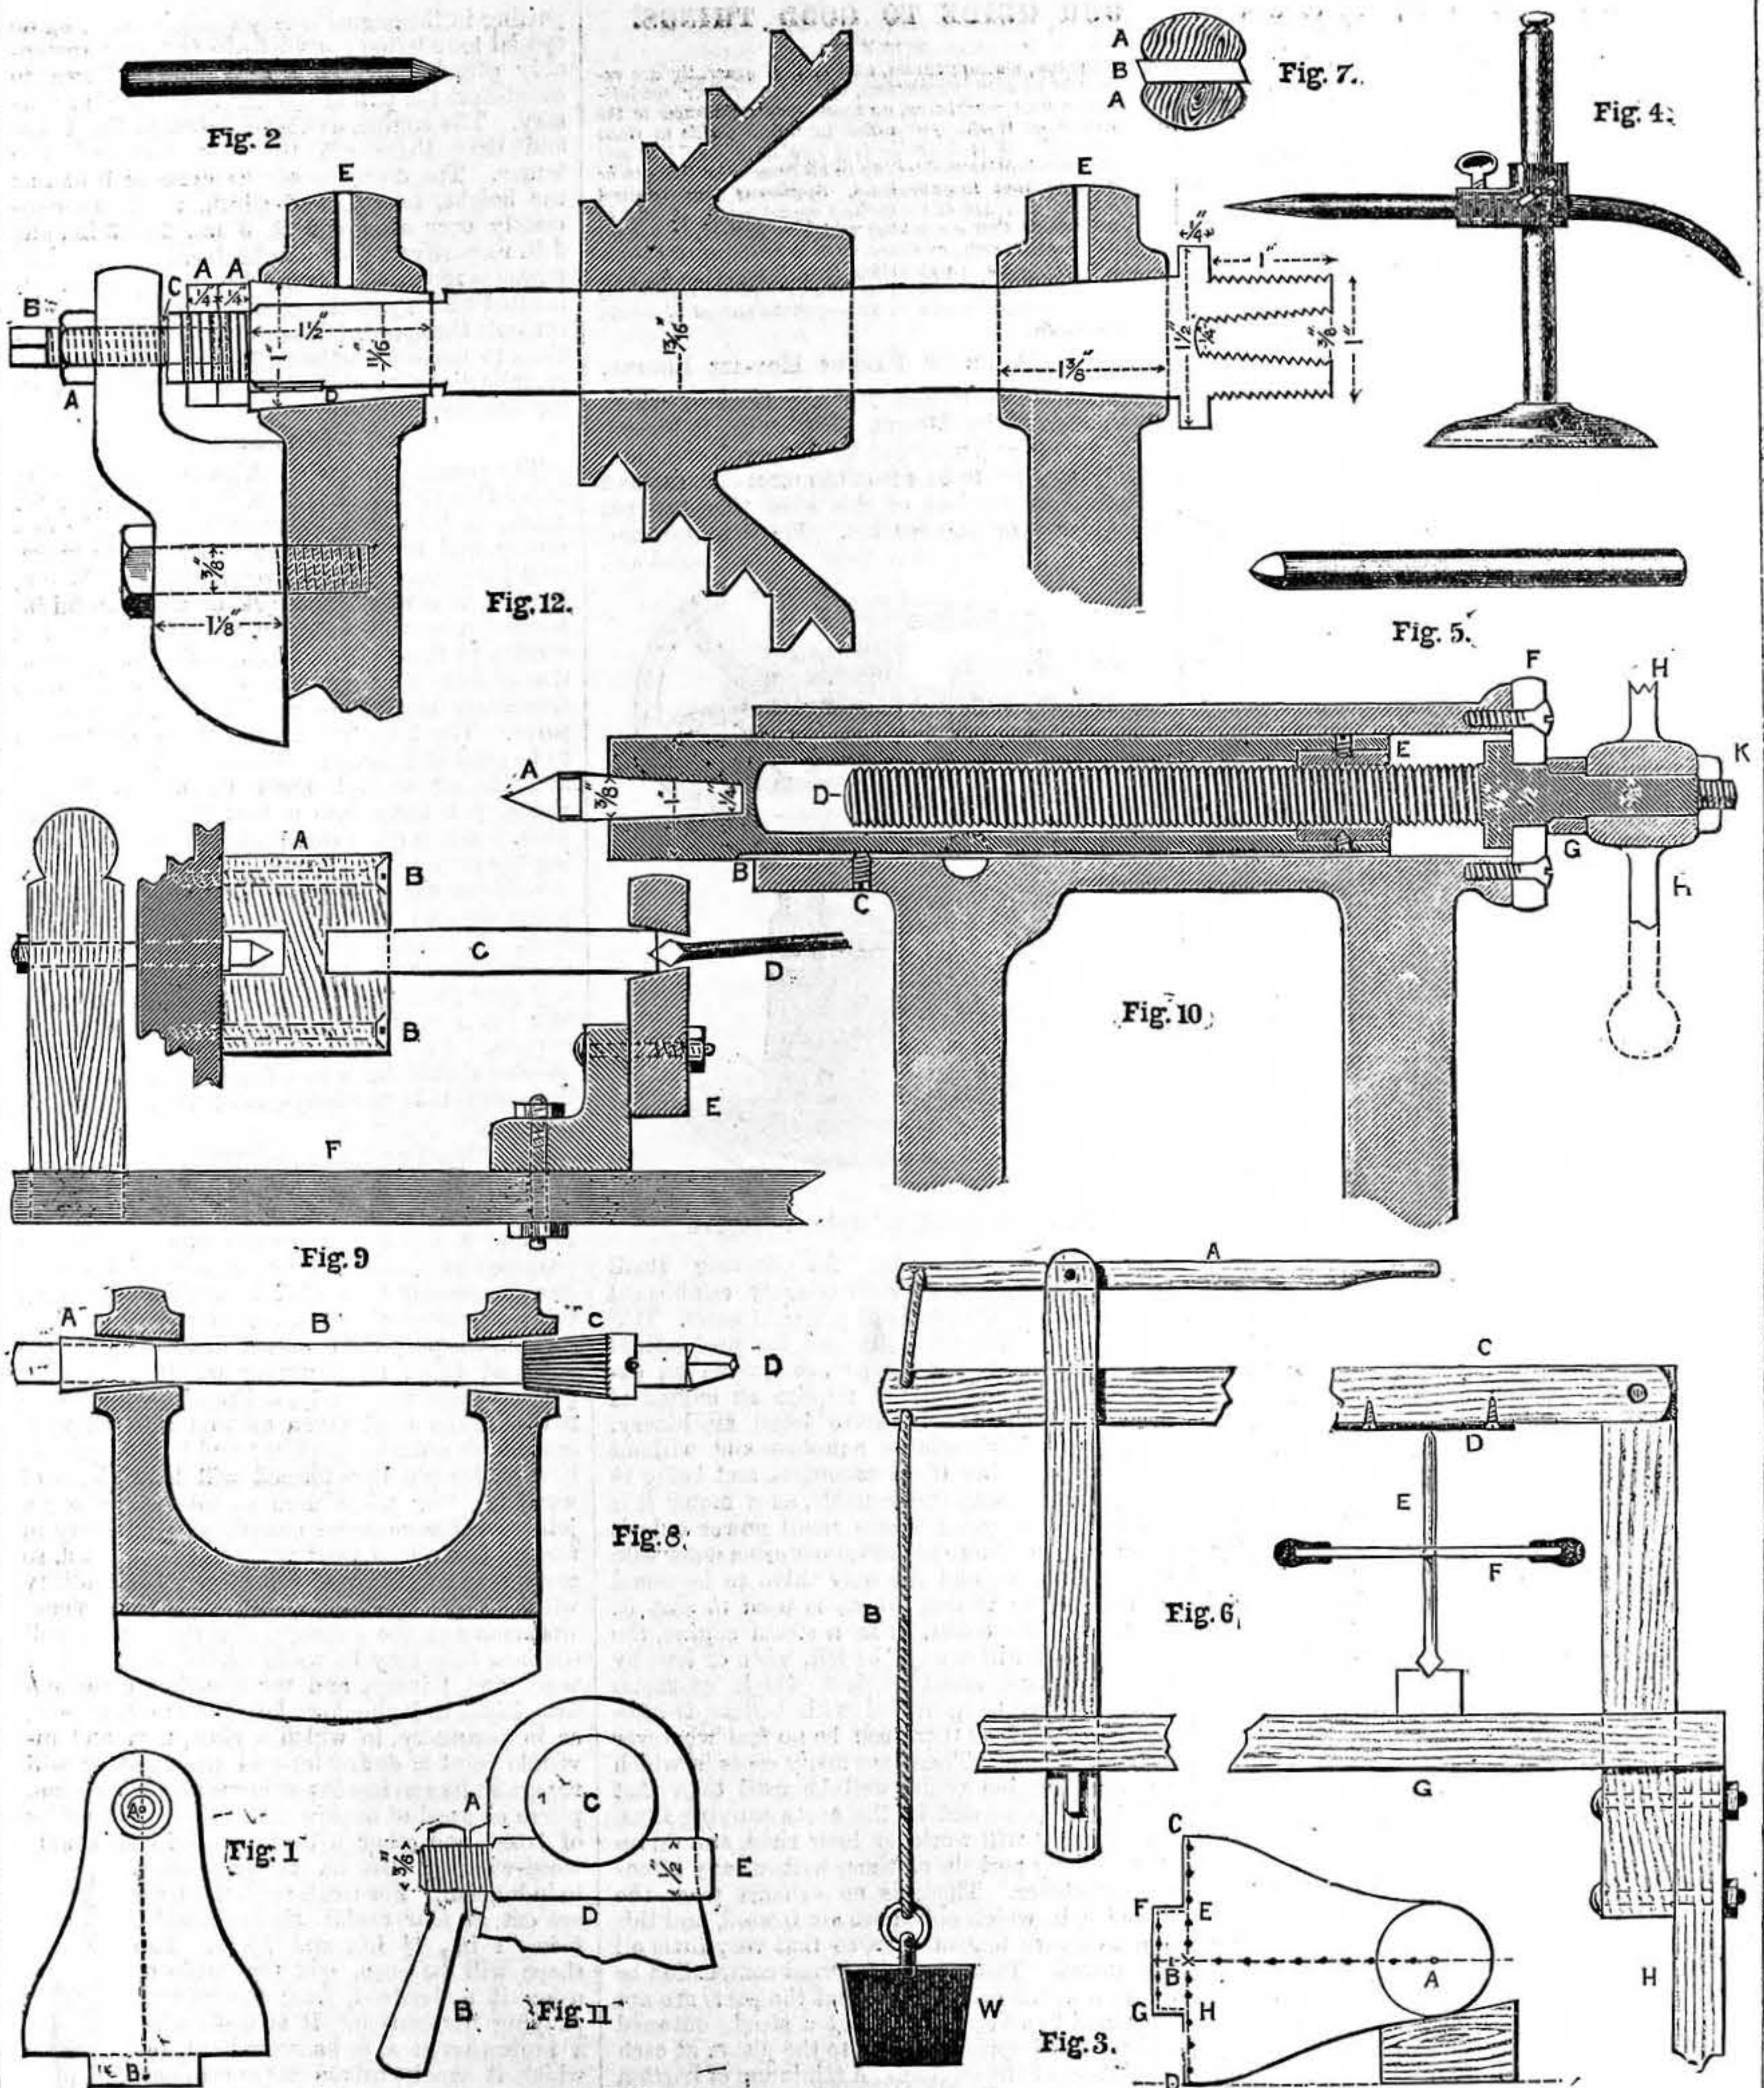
End of Poppet—A, Centre of Cylinder; B, Centre of Tenon. Fig. 2.—Centre-punch. Fig. 3.—Poppet laid for Lining out. Fig. 4.—Form of Scribing-block. Fig. 5.—Tool for drawing Drill Point so as to make it enter truly. Fig. 6.—Simple Form of Drilling Press, which can be bolted to any Bench—A, Lever to relieve Drills; B, Cord to Weight, W; C, Lever to press Drill; D, Metal Strap; E, Drill; F, Handle; G, Bench Top; H, Leg of Bench. Fig. 7.—Section of Tool for truing out Poppet Cylinder—A, Wood; B, Steel; C, Drill; D, Square for Brace. Fig. 8.—Section of Fixed Headstock, showing Mill Boring Bar and Loose Collar—A, Loose Cone; B, Bar; C, Drill; D, Square for Brace. Fig. 9.—Mandrel Forging supported for Drilling—A, Wood Block; B, B, Screws; C, Mandrel; D, Drill; E, Boring Collar; F, Lathe Bed. Fig. 10.—Section of Poppet (half size)—A, Centre; B, Slot; C, Screw to fit Slot; D, Screw,  $\frac{1}{2}$  in. Pitch; E, Nut; F, Disc; G, Washer; H, Hand-wheel; K, Key. Fig. 11.—Transverse Section of Poppet through Clamping Bolt—A, Washer; B, Handle; C, Mandrel; D, Drill; E, Boring Collar. Fig. 12.—Section through Mandrel (half size)—A, A, A, Lock Nuts; B, Steel Screw; C, Hard Steel Plug; D, Feather; E, Tube for Oiling.
